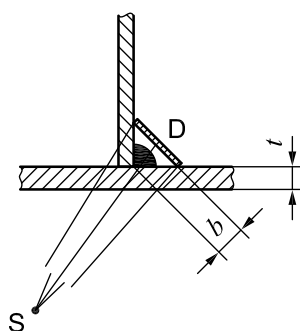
Test arrangement for penetration of fillet welds
